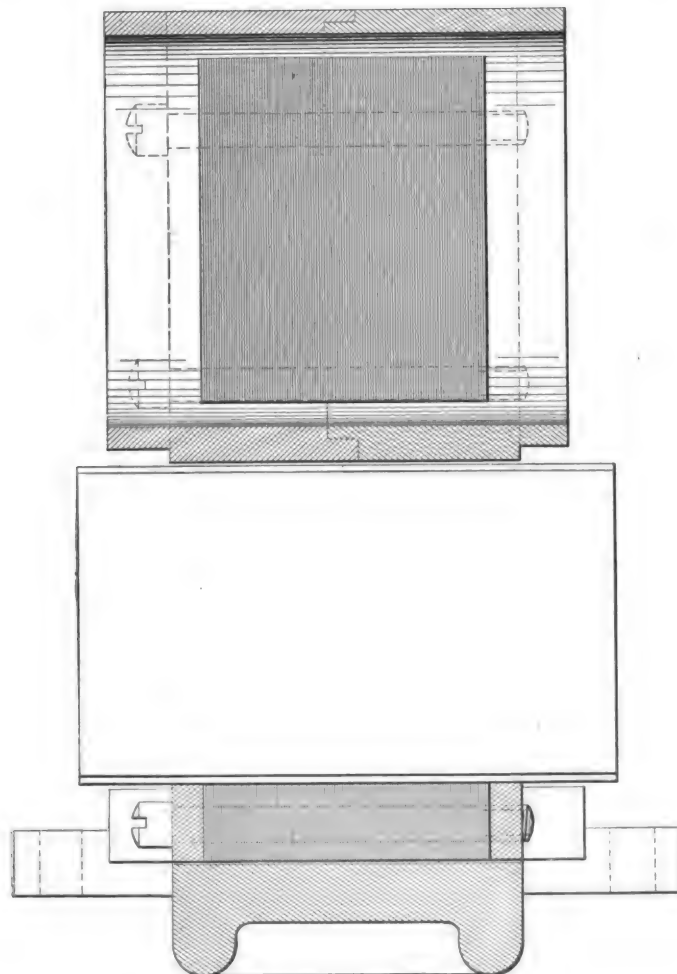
SECTIONAL END VIEW OF FIELD MAGNETS.
